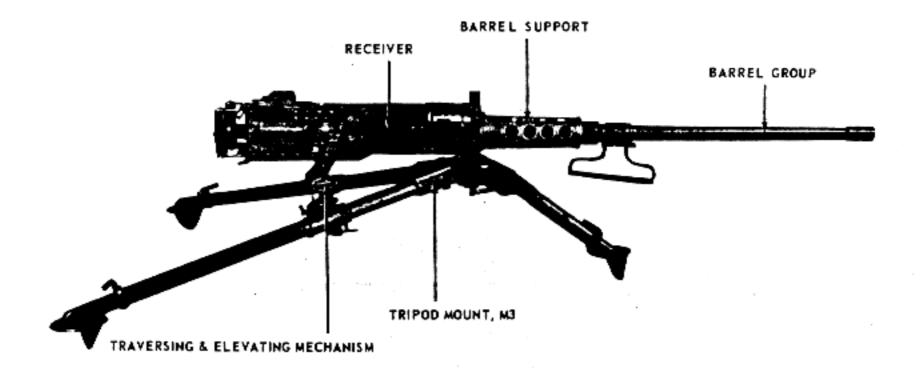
Browning machinegun, cal .50 HB, M2 on tripod mount, M3.
